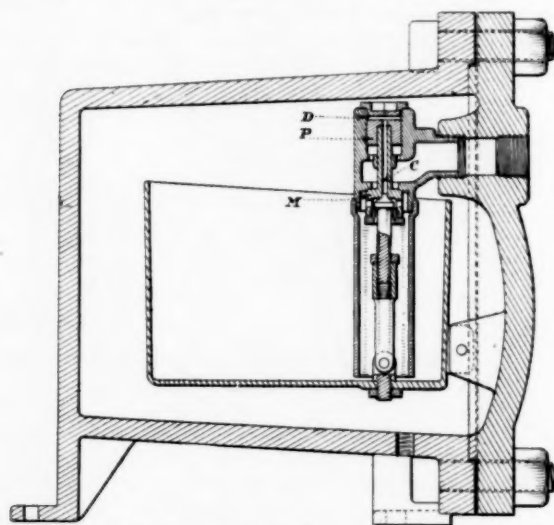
BUCKET-TYPE STEAM TRAP WITH DOUBLE VALVE SYSTEM
